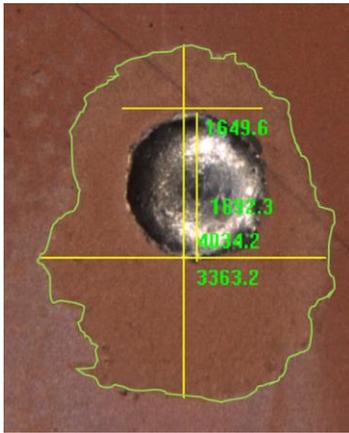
Representative image of the CuOSP solder spread test showing solder spread and flux spread (green outline) measurements using maximum spread diameters perpendicular to each other
